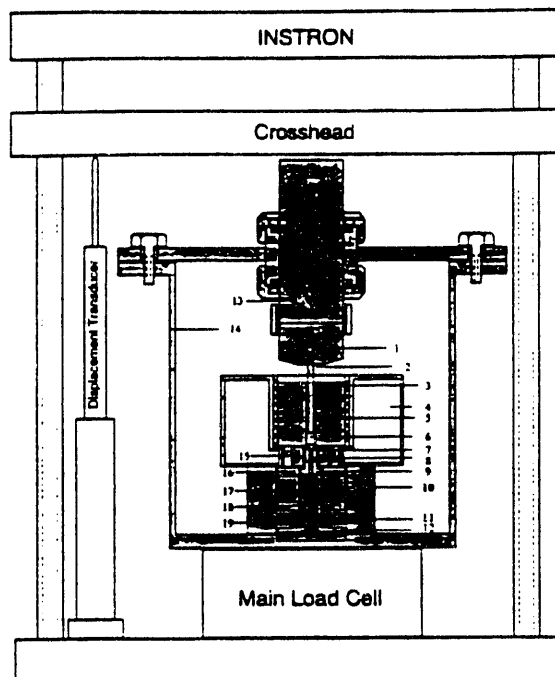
Configuration of "gas lubrication"-type powder compaction assembly. (1) Bridgman anvil, (2) moving punch, (3) die, (4) cooling cylinder, (5) heater, (6) powder, (7) thermocouple, (8) fixed punch, (9) hardening disk, (10) heat insulating ring disk, (11) frictional load cell, (12) positioning and heat conducting disk, (13) pressure transmission piston, (14) environmental chamber, (15) frictional load transmission pistons, (16) hardening ring disk, (17) heat insulating disk, (18) hardening ring disk, (19) plastic positioner.
